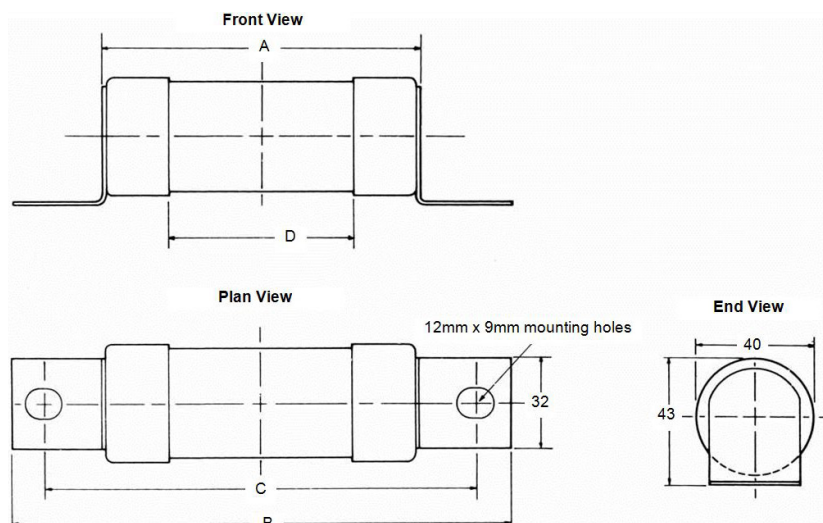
Design and Dimensions (mm) for VSD Surge Diverters
